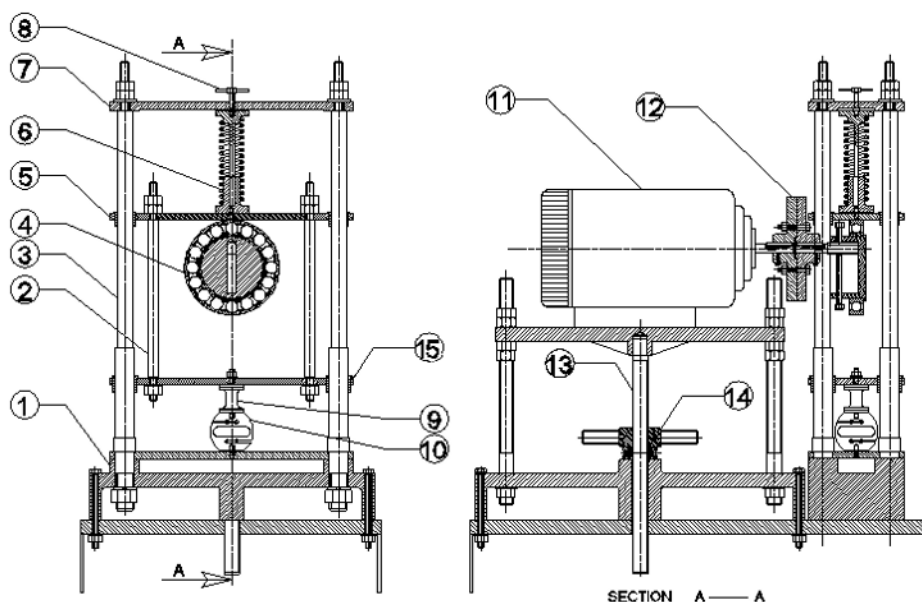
Section elevation and section side view of rubber fatigue test apparatus (the specimen is in tension /compression): 1-base, 2-column, 3-main column, 4-ball bearing, 5-main plate, 6-cylindrical helical compression spring, 7-upper plate, 8-adjustin bolt, 9-rubber specimen, 10-load cell, 11-electric motor, 12-flange coupling, 13-power screw, 14-bronze nut, 15- lower plate.
